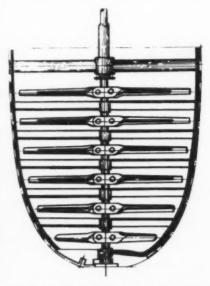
Design for double motion agitators. Note space between bars. (Courtesy Buflevak Equipment Div. of Blaw-Knox Co.)
